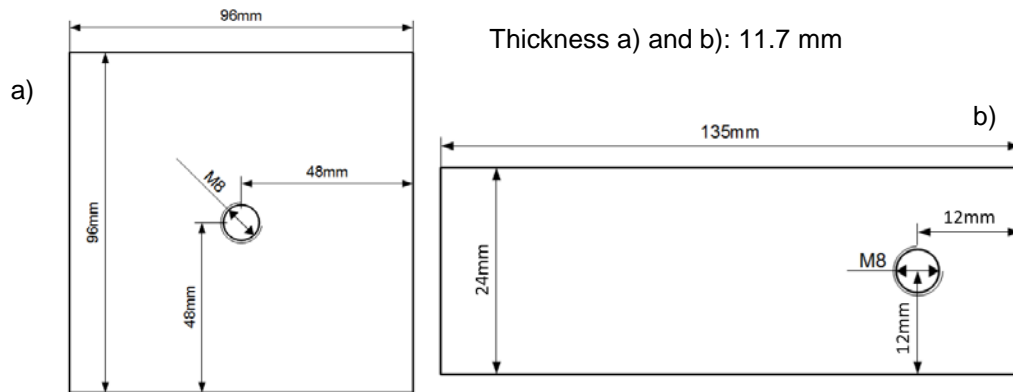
a) and b). Dimensions of the test specimens: a) pull-out test, b) bearing test
